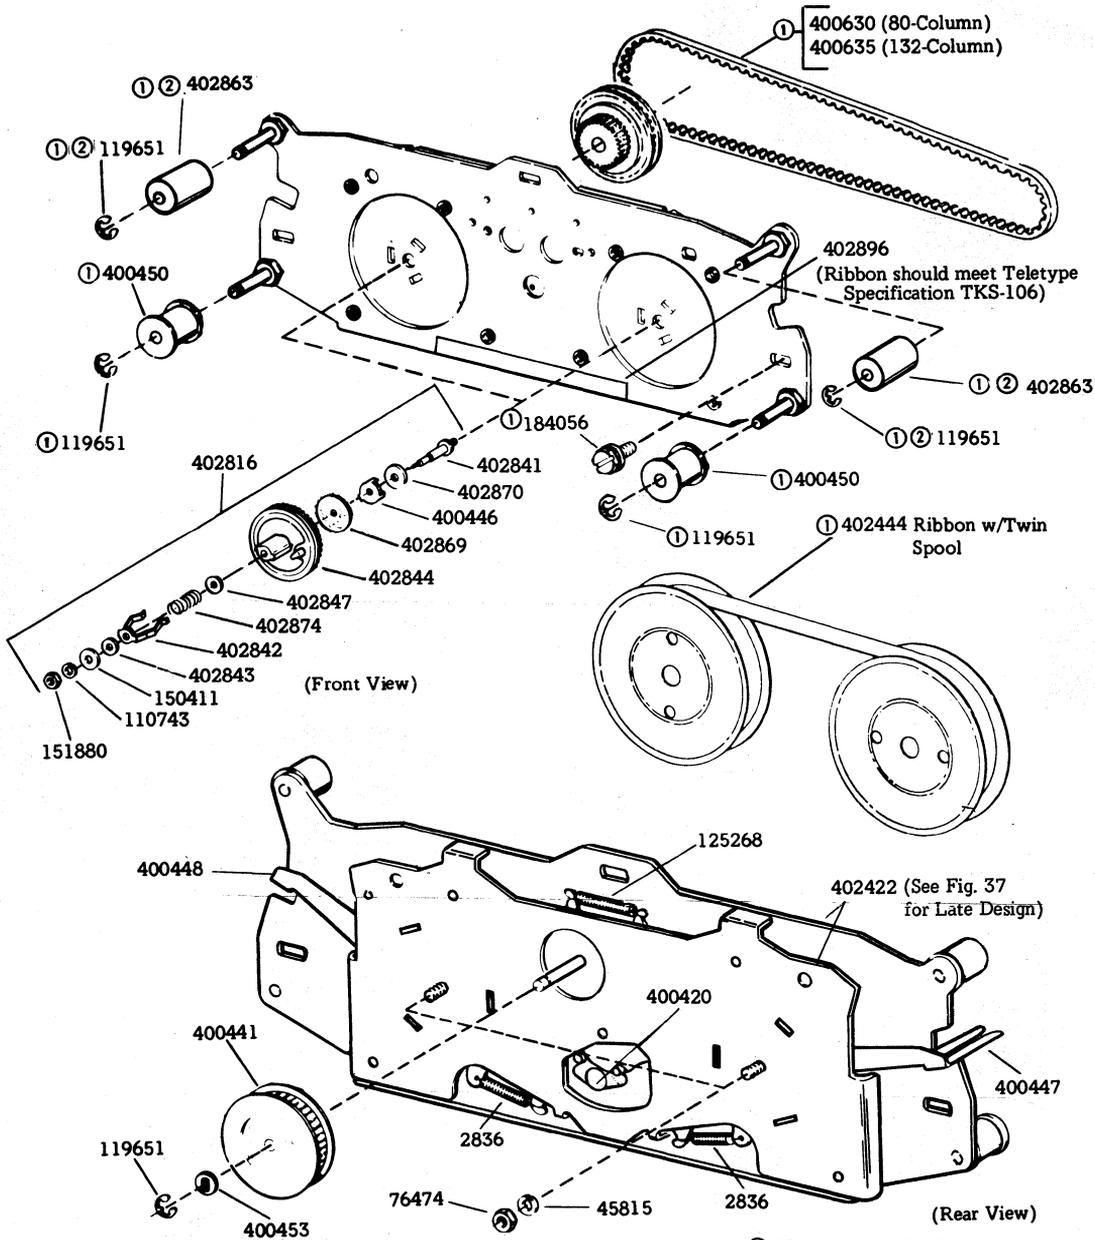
Ribbon Feed Assembly (Tractor Feed - 80 and 132-Column)
